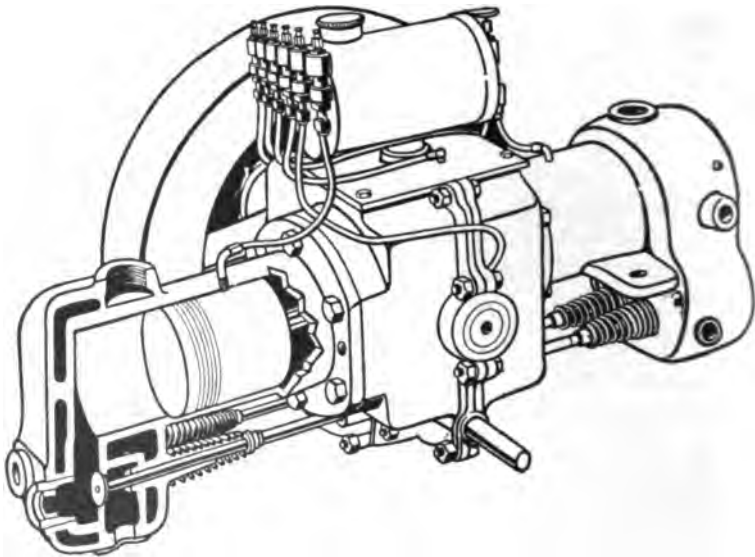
Section of the Ford Motor, showing positively operated inlet valves.
